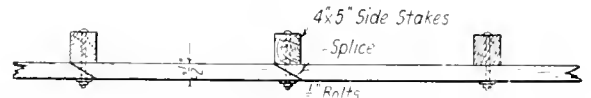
Spliced Planking for Wooden Sides of Coal Cars
